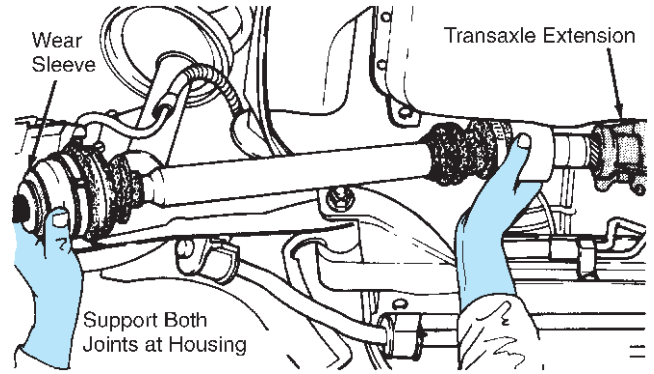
After a shaft has been disconnected, it should be removed carefully to prevent damaging the boots or CV joints; it should then be carried in a horizontal position. (Courtesy of DaimlerChrysler Corporation)
